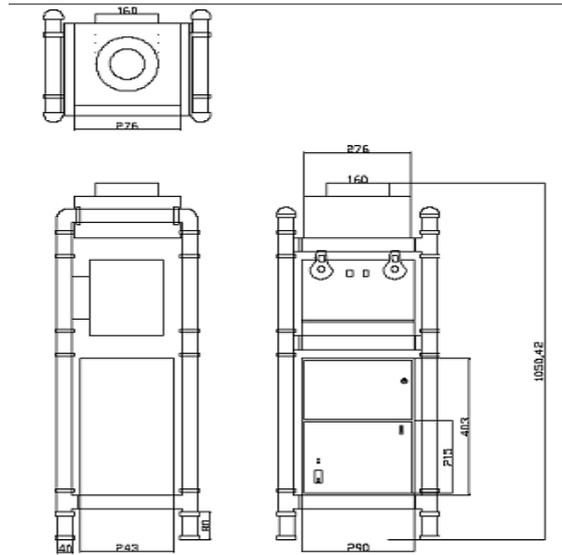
Orthographic Drawing Hot and Cold Water Dispenser with Inbuilt inverter
